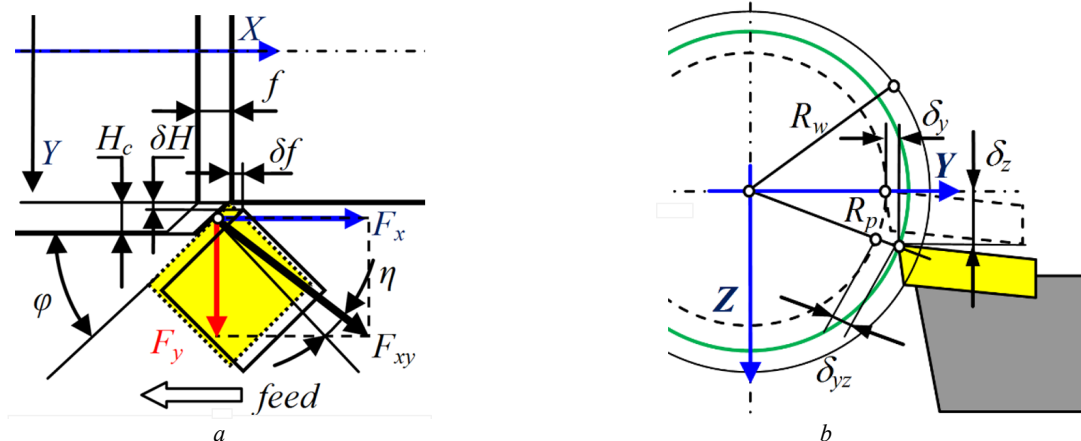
Calculation scheme: *a* – components of cutting force; *b* – elastic displacements
